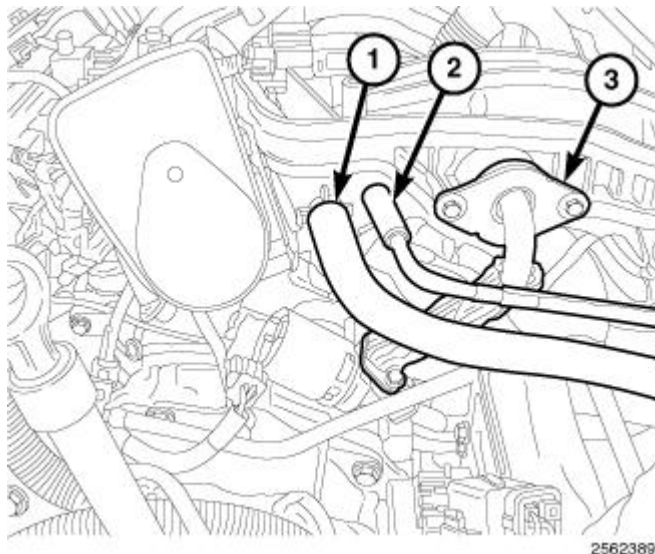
Locating Upper EGR Tube, Brake Booster Hose & Vapor Purge Hose
